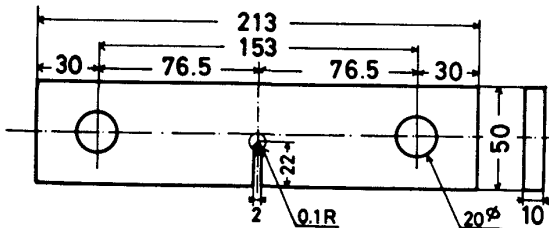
Dimension of test specimens used for the present investigation (mm).
